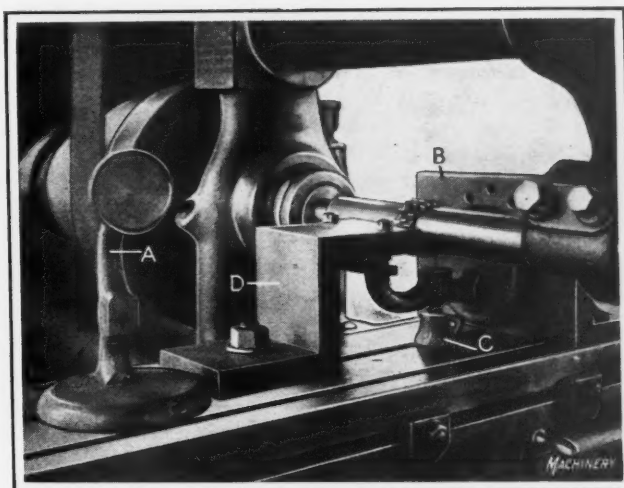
Milling the Pad to which the Table Stem Bearing is attached
